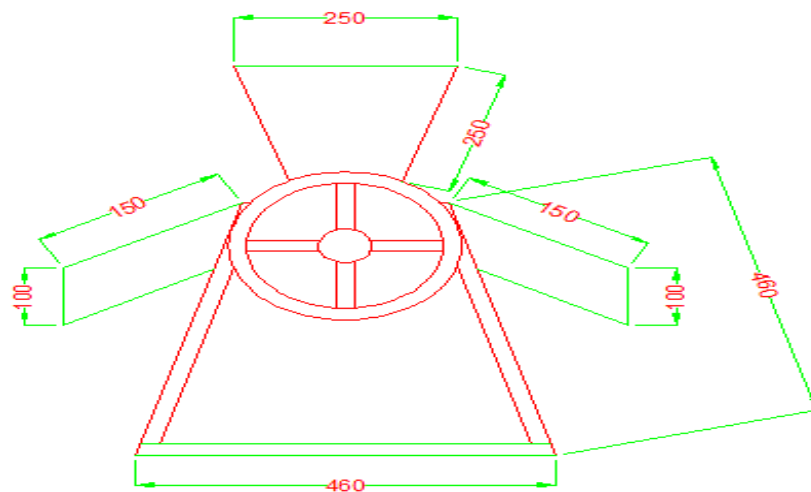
Orthographic projection (End view) of the soybean dehulling machine. All dimension in mm.
